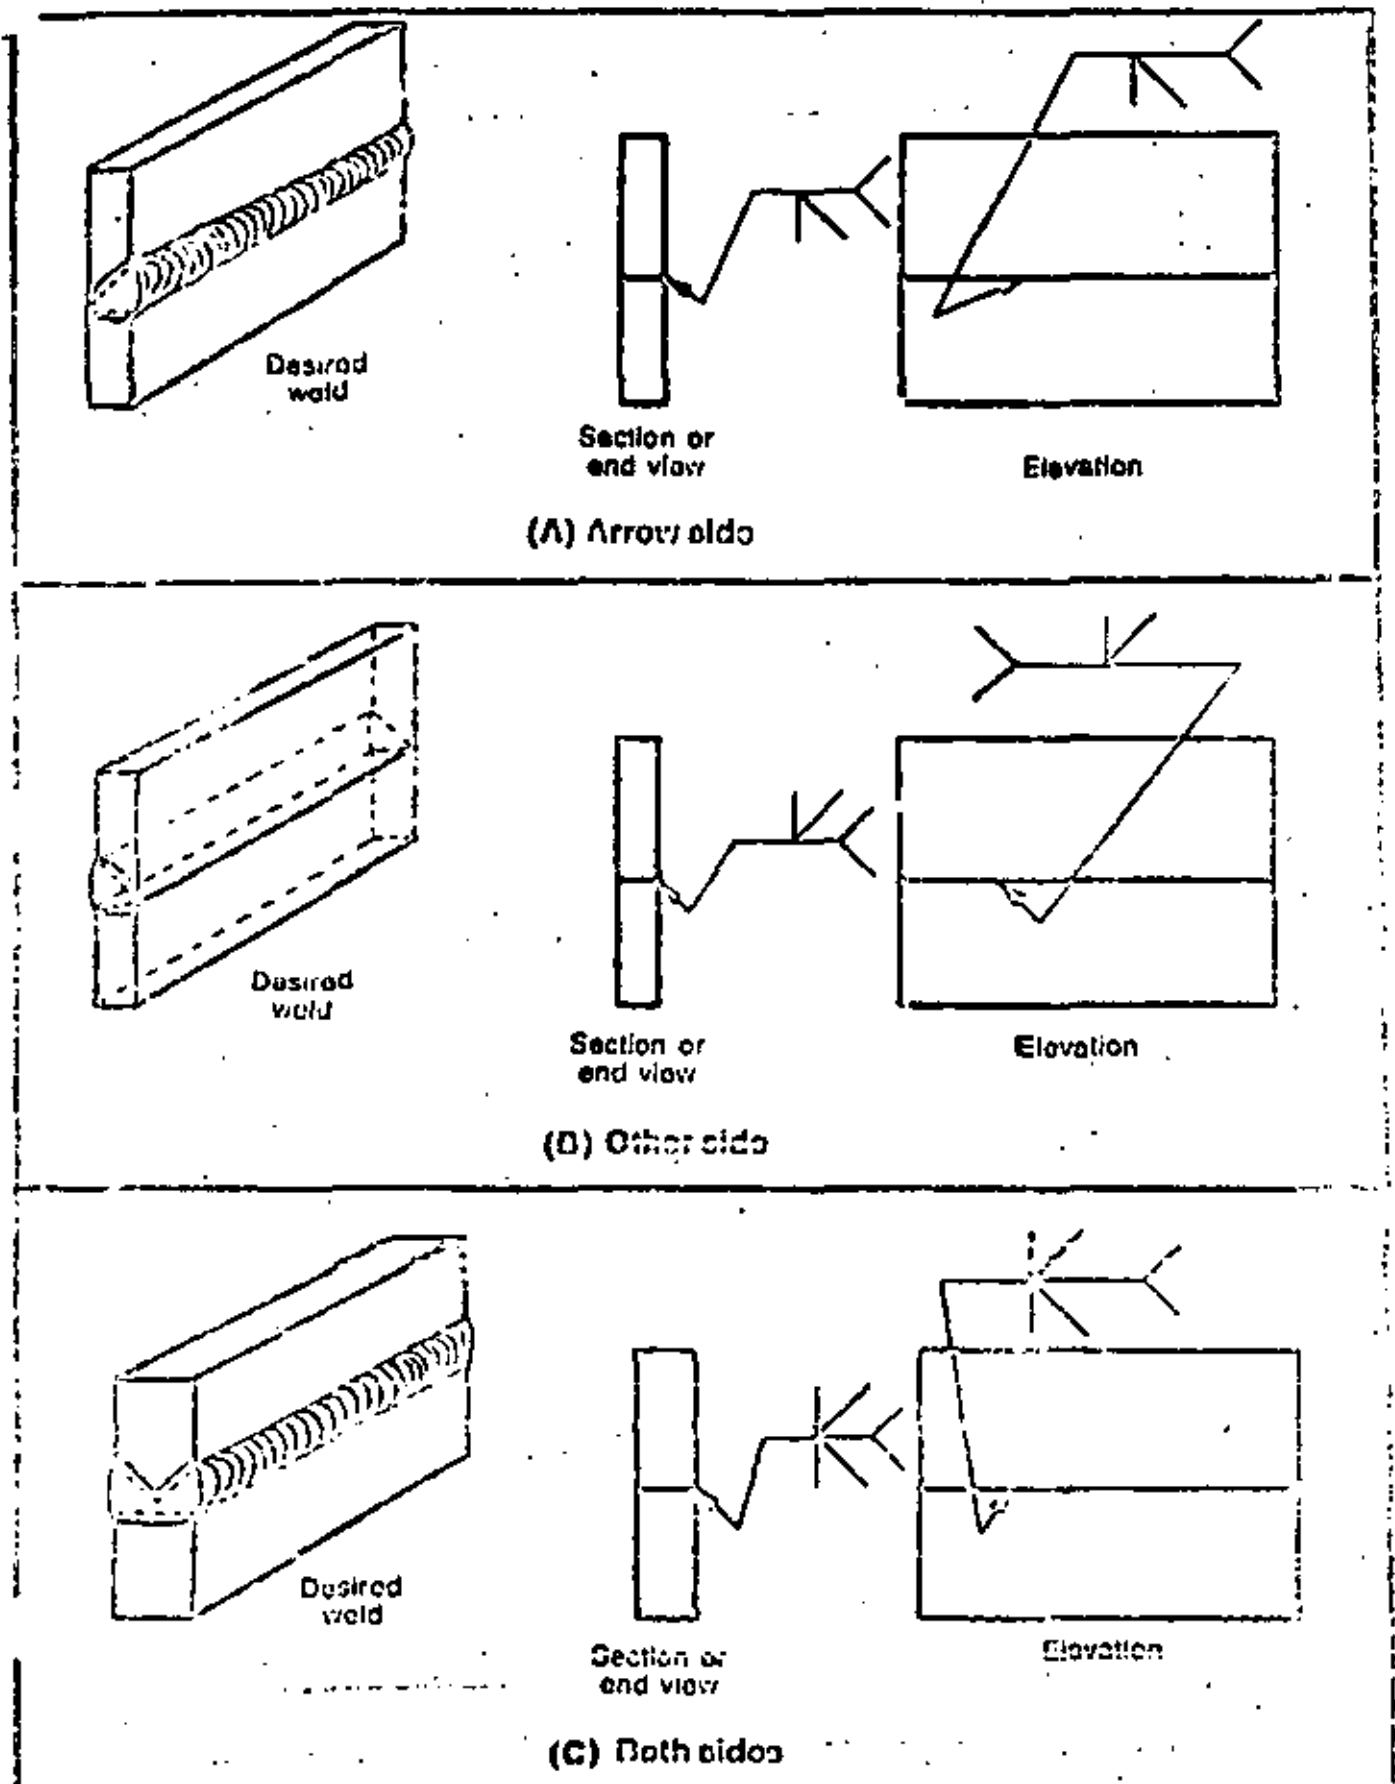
(cont.)—Application of flare-bevel- and flare-V-groove weld symbols
